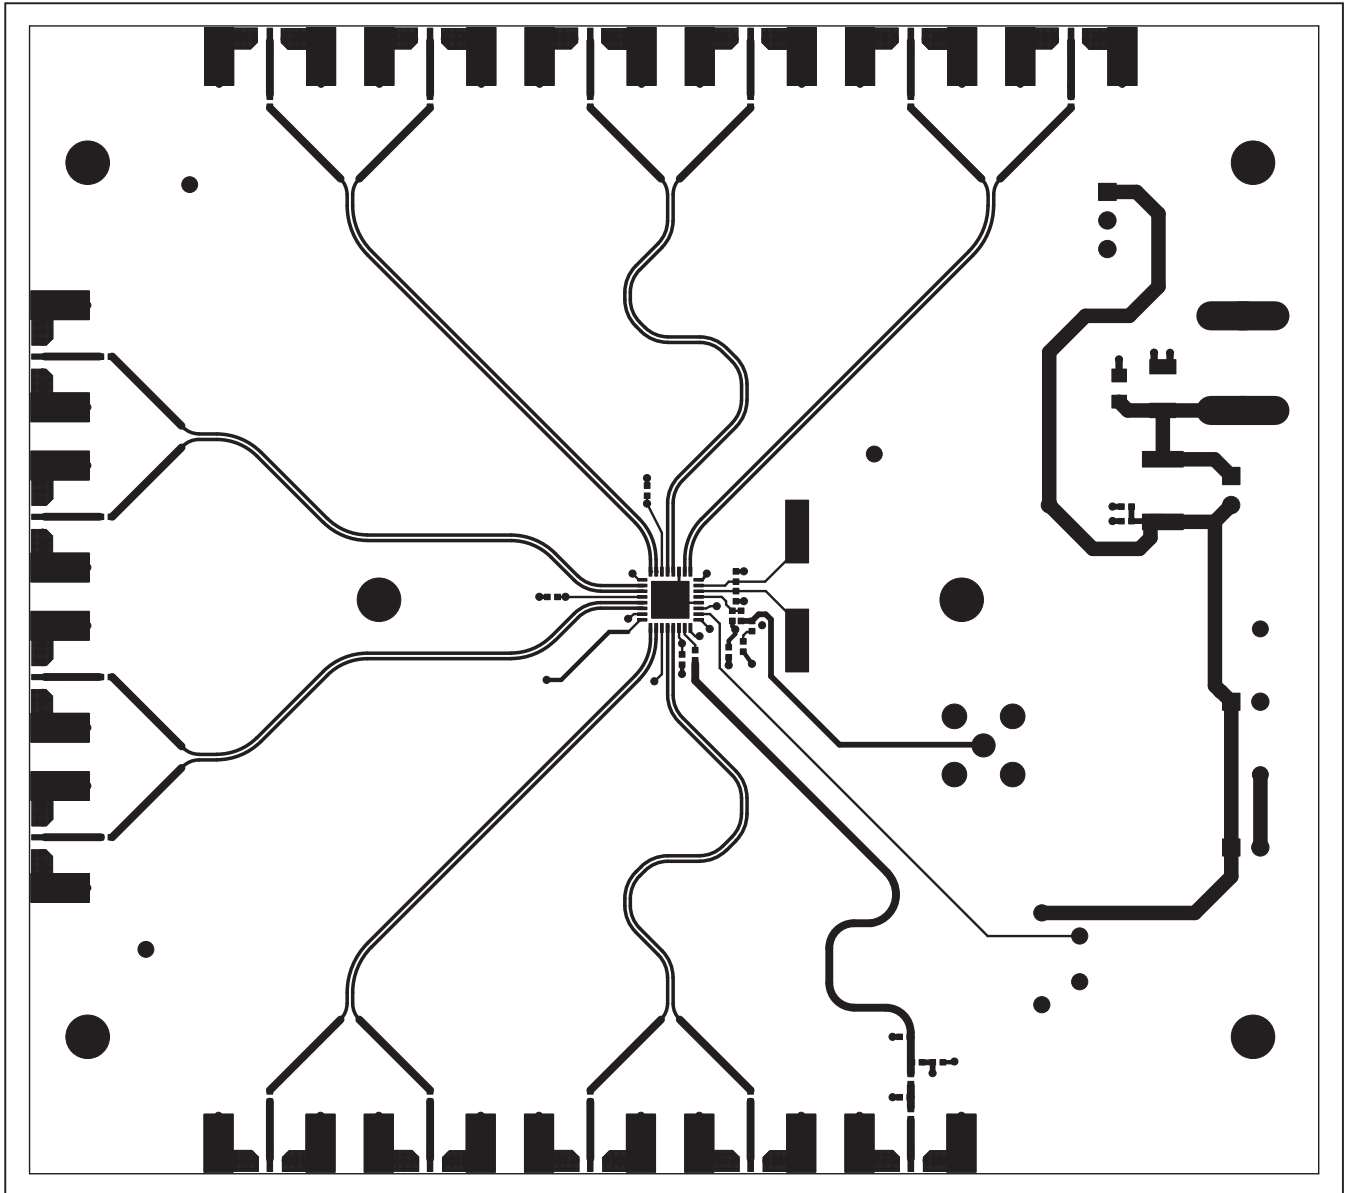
MAX3677 EV Kit PCB Layout—Component Side
